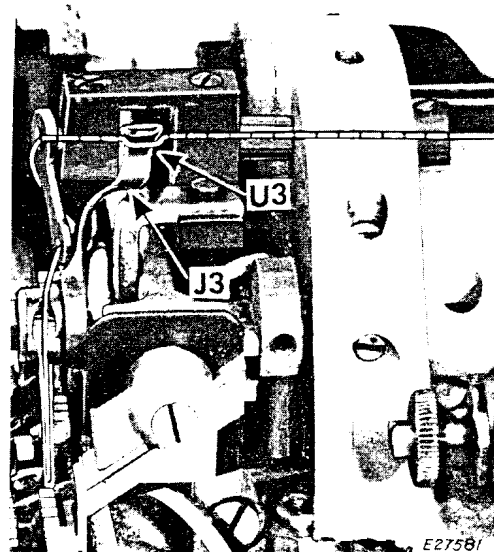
Needle Thread Controller 164151 in Correct Relation to Needle Thread
